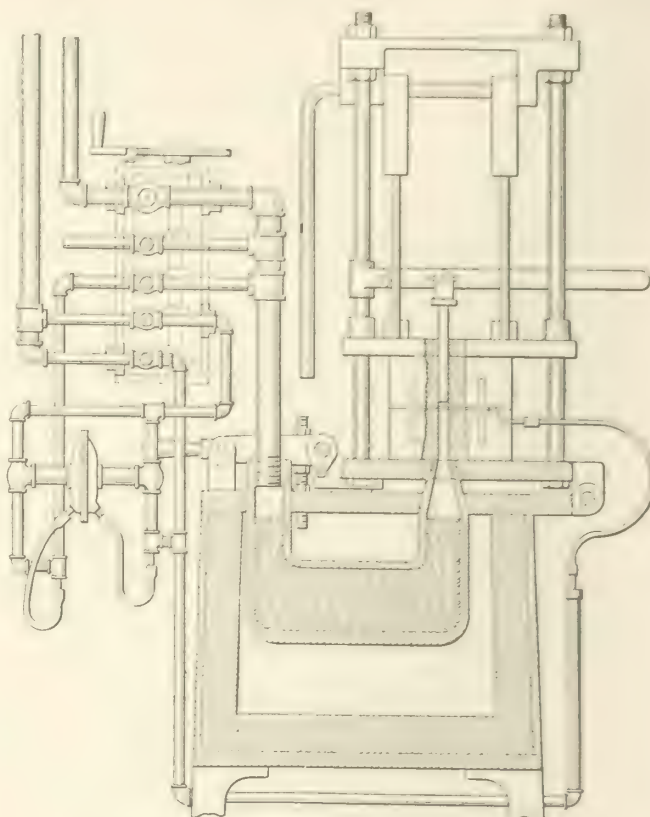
ANOTHER TYPE OF COMPRESSED-AIR MACHINE.
